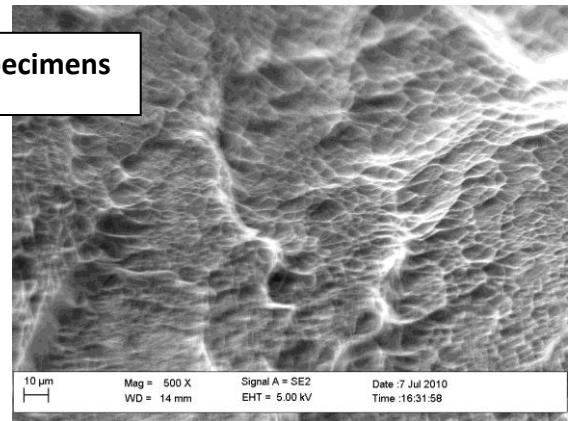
Fracture surface of the horizontal specimen after tensile testing
